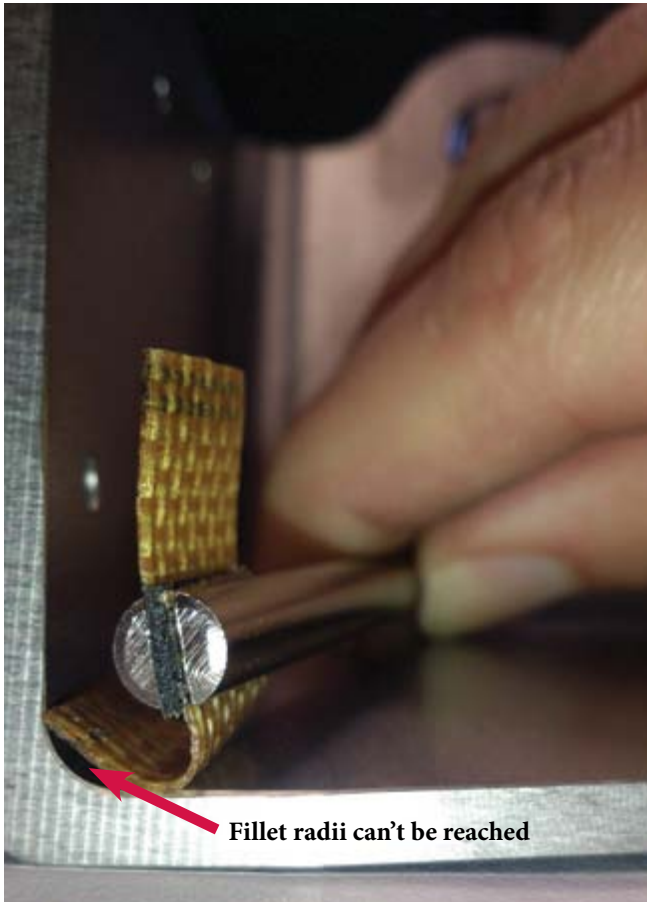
Example of a radius (0.3 inch/8 mm) that is too small for roto peening
